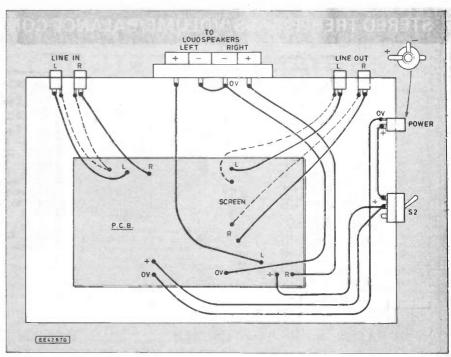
Approximate positions of the case mounted components and circuit board. The tone controls and Loudness switch are mounted on the aluminium front panel.
